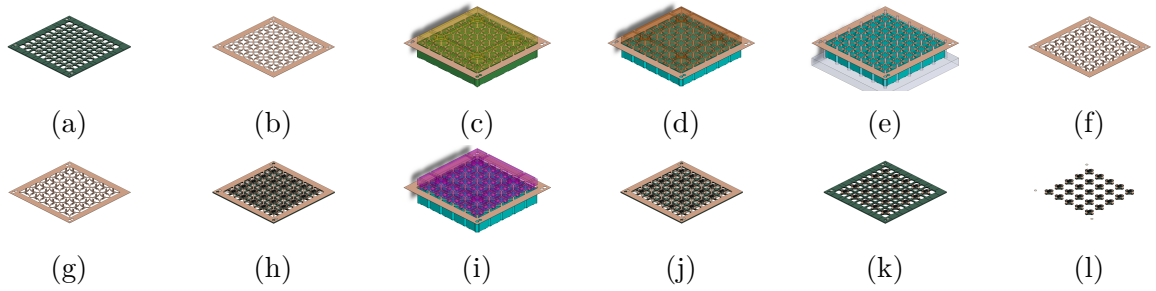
4BIc process steps: (a) PCB 5x5 v-cut panel of sot323 tiles, (b) Fiber laser-cut leadframe, (c) Eject trash for solder rivets later, (d) Form 1: 90 degree bend, (e) Eject leadframe, (f) Formed leadframe 1, (g) Flip over, (h) Register against PCB for reflow step, (i) Form 2: 60 degree bend, create compliant contacts, (j) Formed leadframe 2, (k) Laser Singulation: remove leadframe tie-bars, (l) Tool Singulation: shear PCB v-cuts
